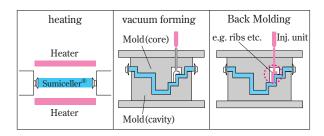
Back Molding Process (Combination of vacuum forming and injection molding)
